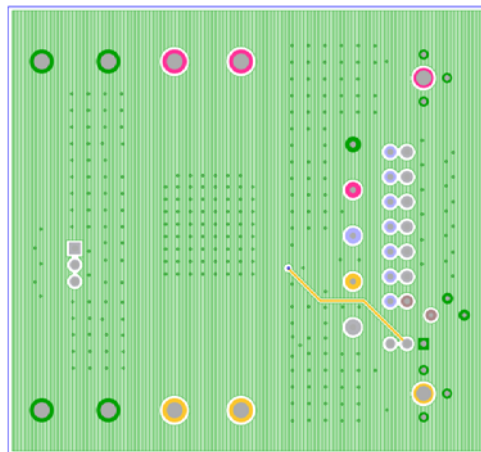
PCB – BOTTOM LAYER (VIEWED FROM TOP)
